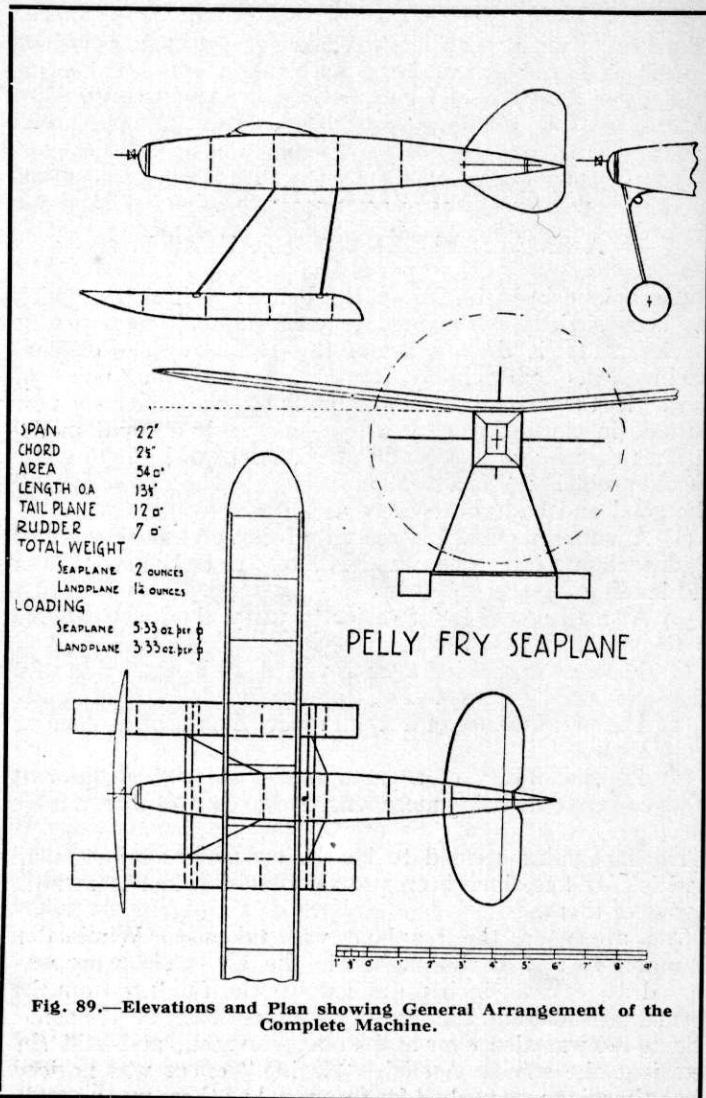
Elevations and Plan showing General Arrangement of the Complete Machine.
